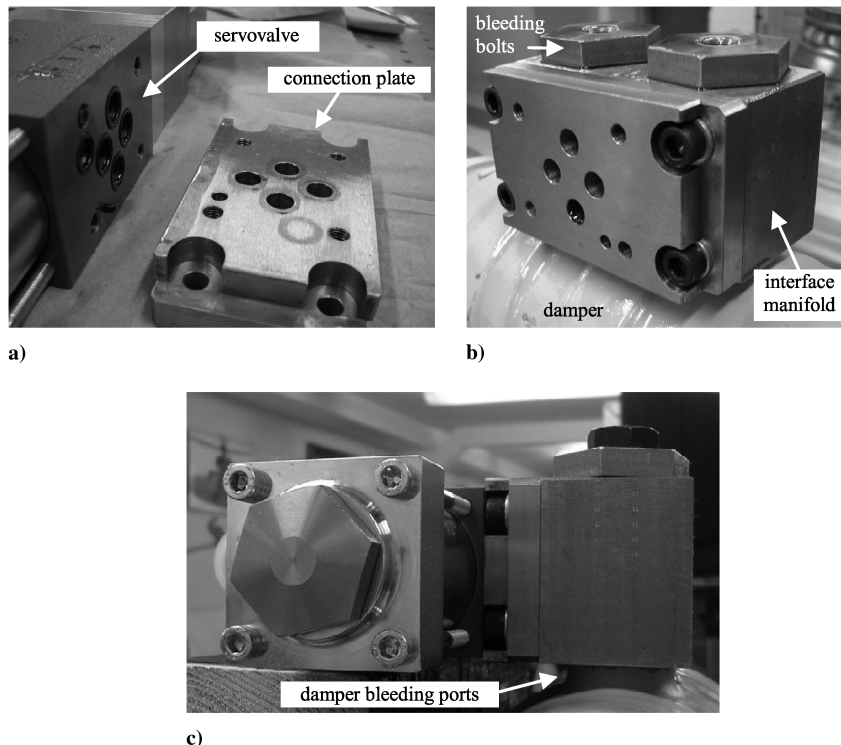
Physical components of the modified hydraulic damper: a) connection plate with D636 servovalve, b) extension assembly with interface manifold and connection plate, and c) complete damper extension assembly.
